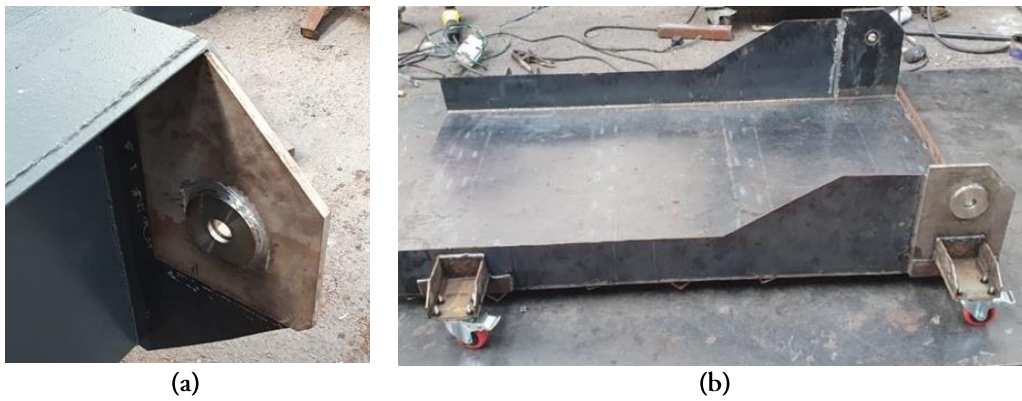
(a) Installation of pinion and check plate and (b) Wheels position.
